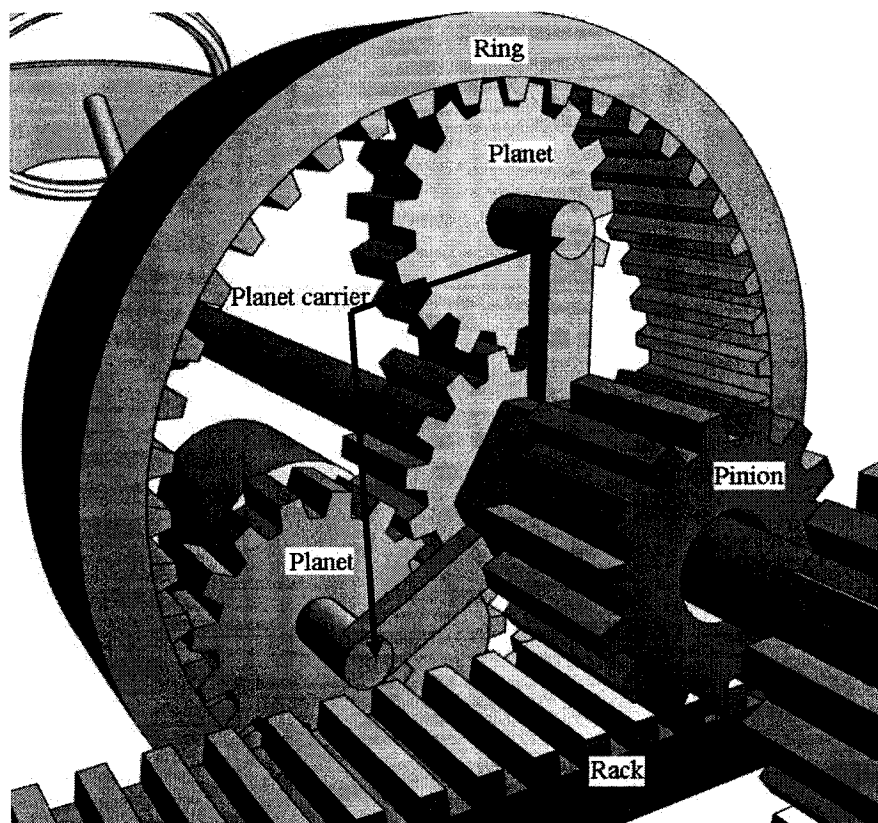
AIFS mechanism, planetary gear and rack-pinion mechanism
